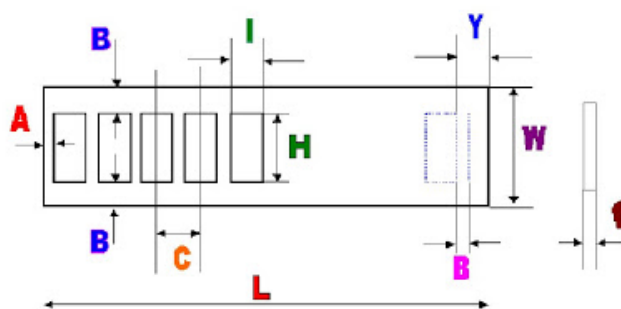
Blank layout dimensions. A – scrap front, B – blank to coil edge distance, C – pitch progression, H – width of part, I – length of part, W – total strip width, t – material (coil) thickness, L total length of strip layout [30]
